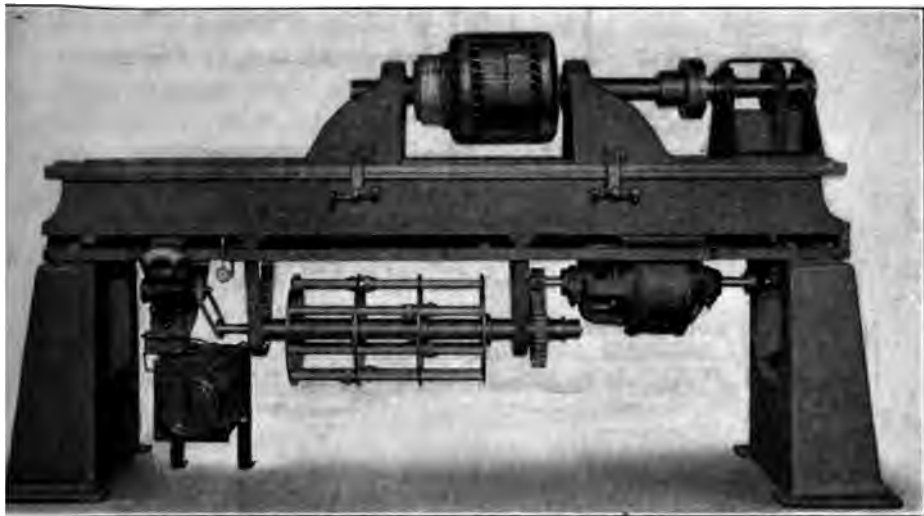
DYNAMIC BALANCING MACHINE. TESTING AN ARMATURE
